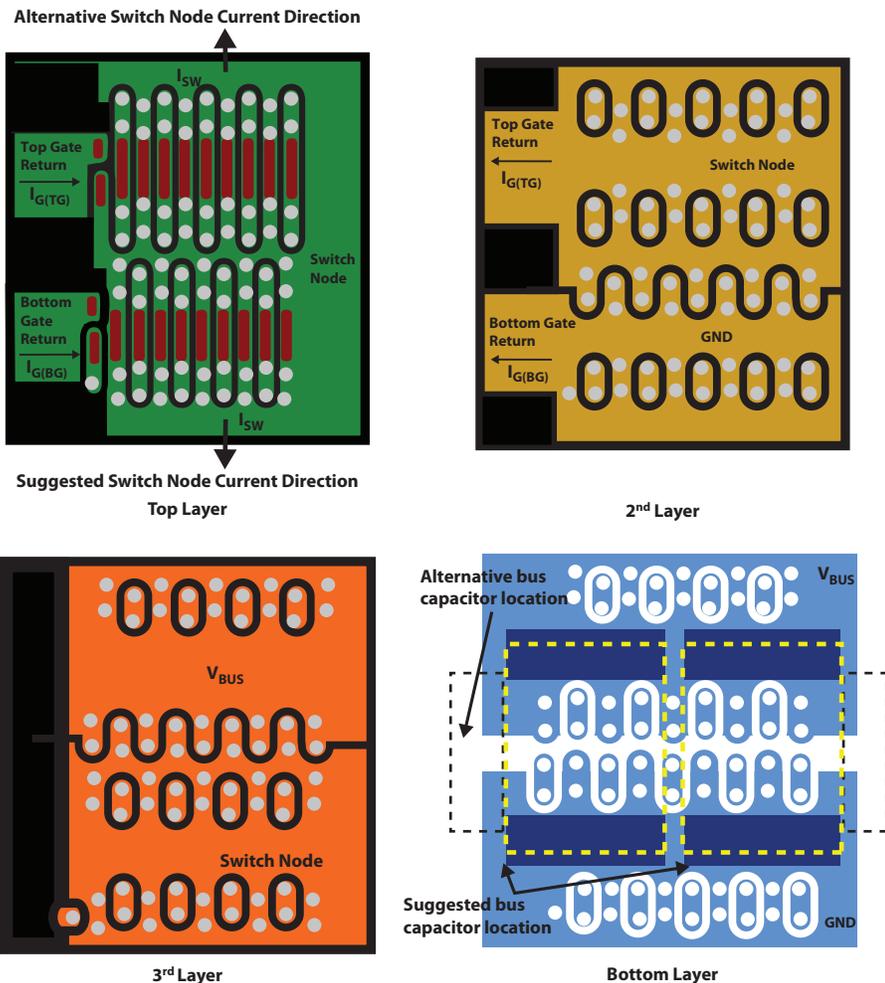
Example of a half-bridge layout using 4-layer PCB.
